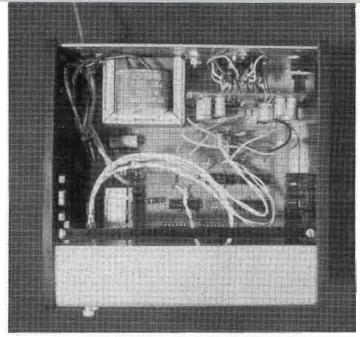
ES400 timer completed, with interface card and socket J2 added.
